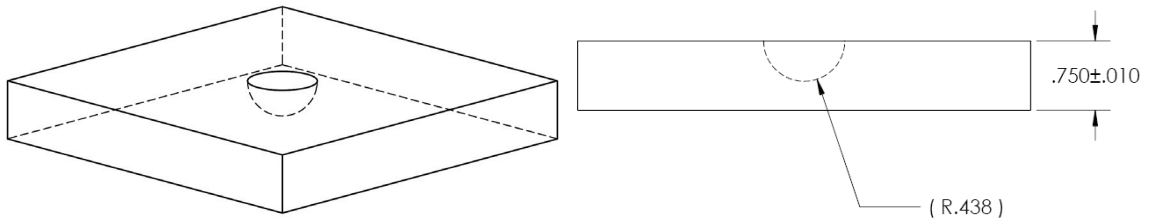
Initial design of heat-forming mold for chronic canine parylene retinal implants. Units are in inches.
